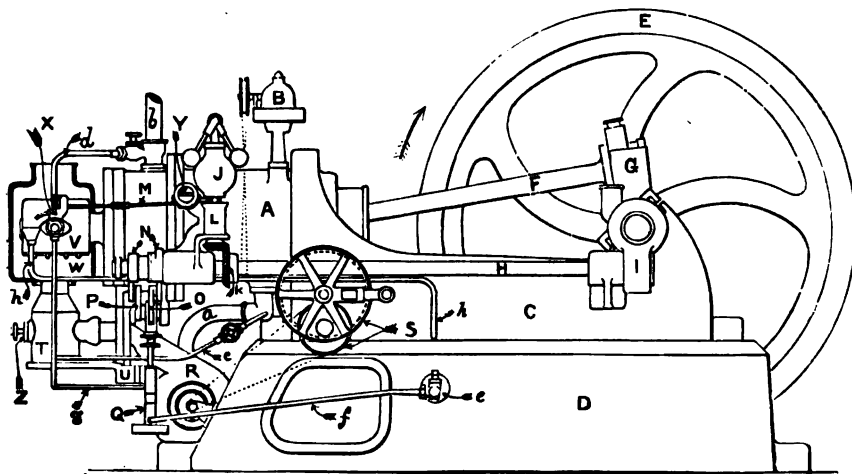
EXPLANATORY DIAGRAM OF HORNSBY-AKROYD ENGINE.
